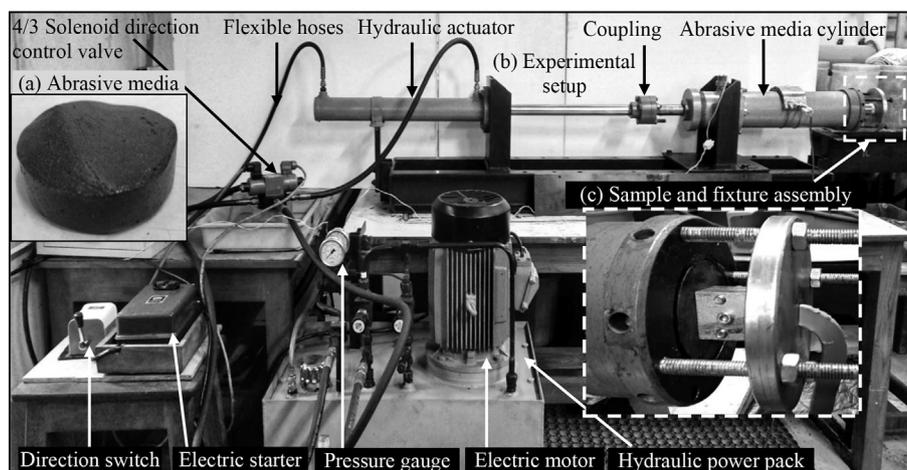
Photographic view of a unidirectional abrasive flow finishing process.
